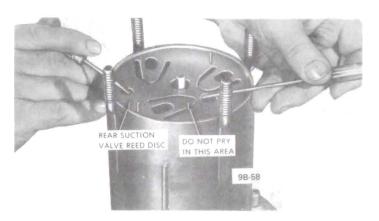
B-66 Removing Rear Suction Valve Reed Disc During disassembly, the disc generally adheres to the plate and both pieces lift out together.
